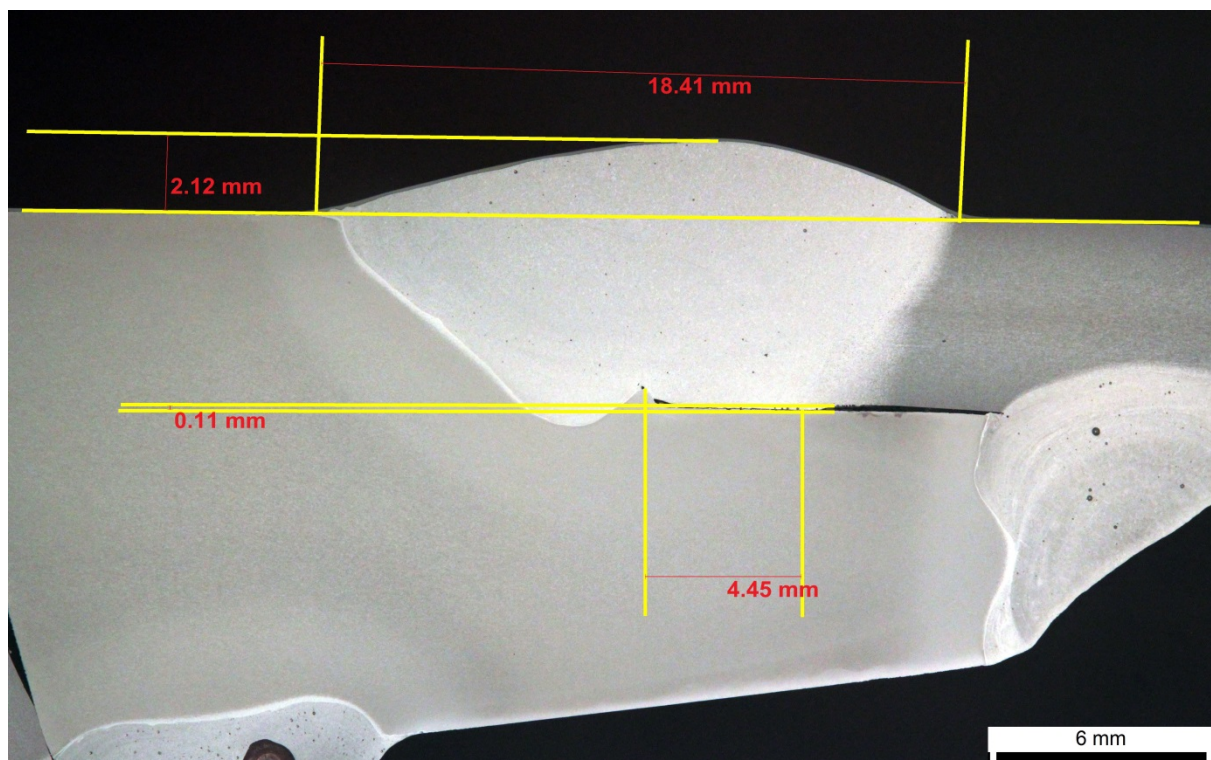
J3564 sample W03-04, slice 2, right side of Figure I33. Small pore above the positioner lip, and large gas pore in the fillet weld joining the bulkhead to extrusion band.
